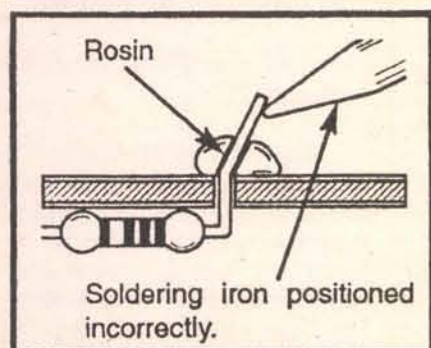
Don't put the solder iron tip up on the component lead. Wrong!
